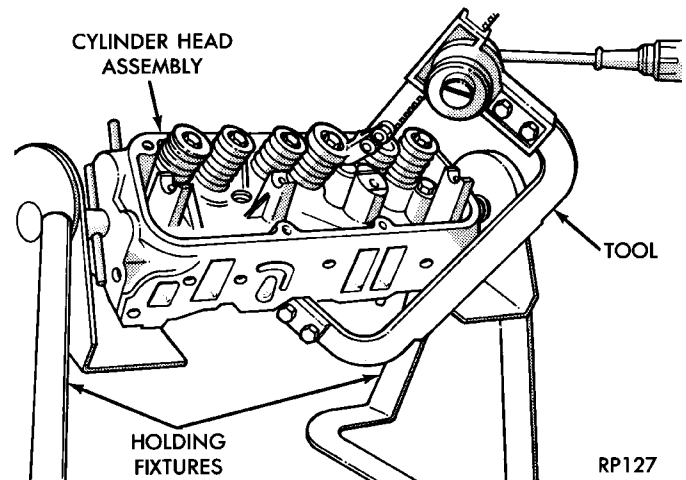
Compress Valve Springs with Special Tool C-3422-B with Adapter 6412
